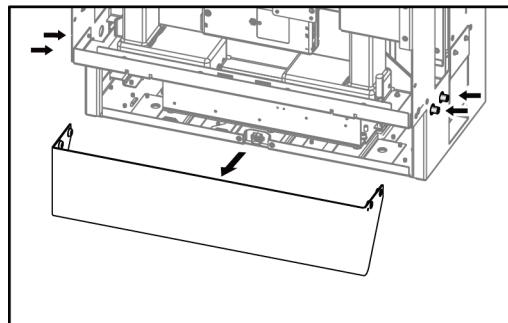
Removing original factory-installed Lower Front Panel (kick plate)
